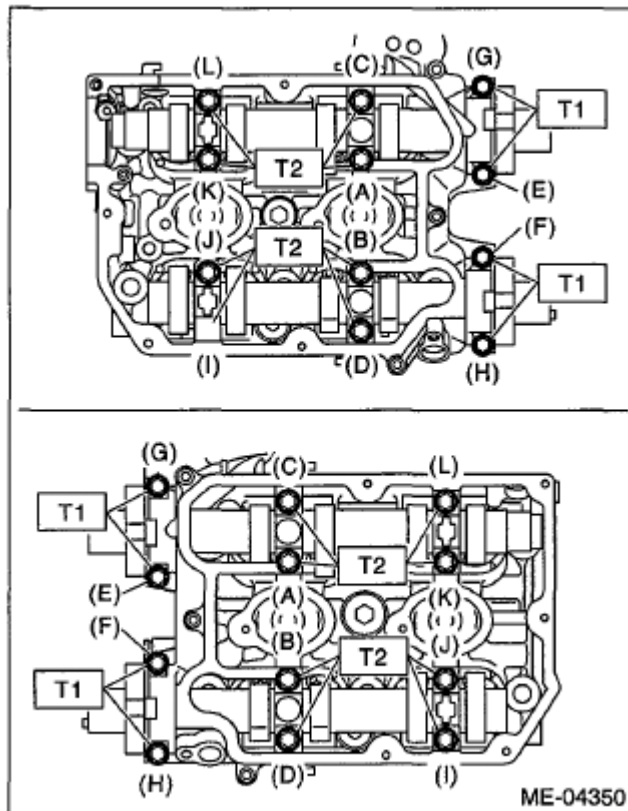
Identifying Camshaft Cap Bolts Tightening Sequence
